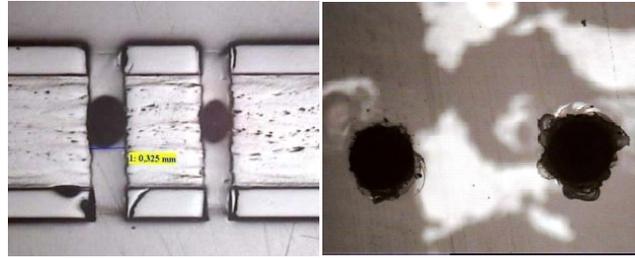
Optical photograph of two drilled holes in glass surface build-up. The diameter is 300 μm. The pitch is about 1 mm. Small cracks at the bottom edge arise (figures courtesy of Contag GmbH).
